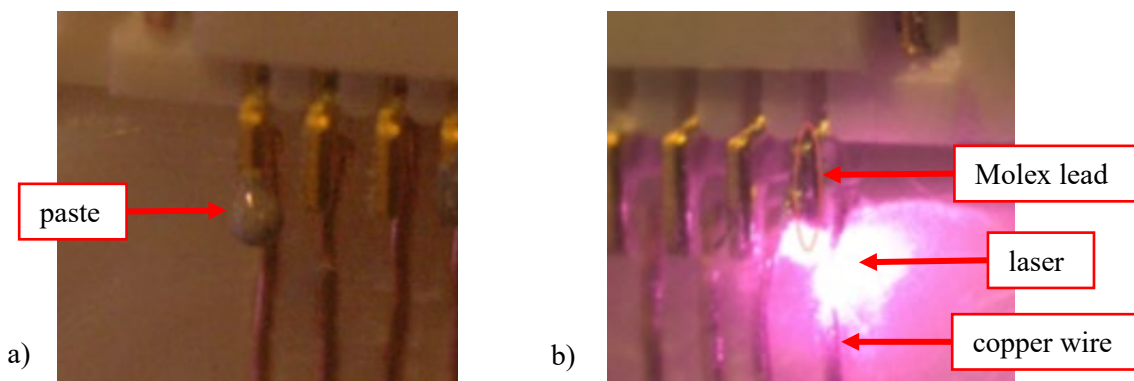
a) Solder paste dispensing, and b) laser soldering.
